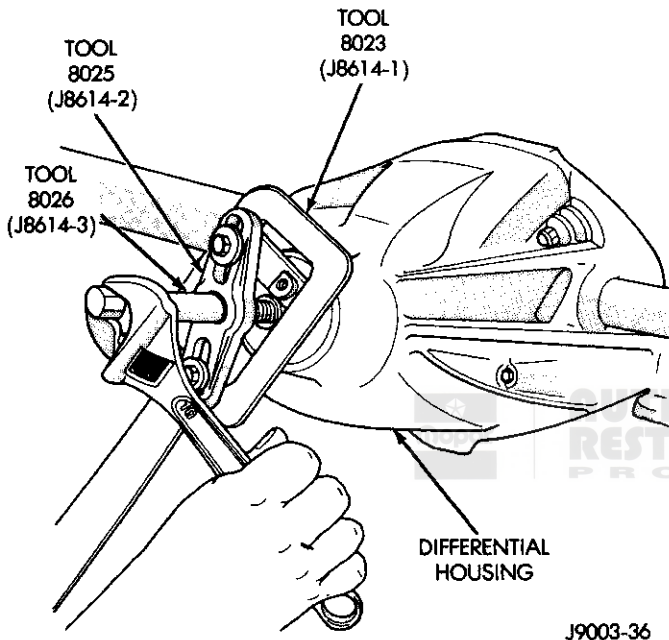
Pinion Gear Shaft Nut Removal/Installation
